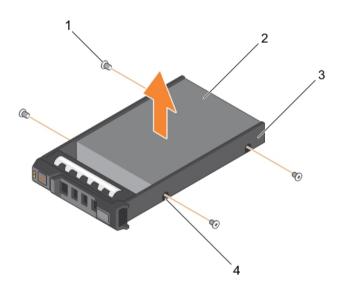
Removing and installing a 2.5 inch hard drive/SSD in a 2.5 inch hard drive/SSD carrier
